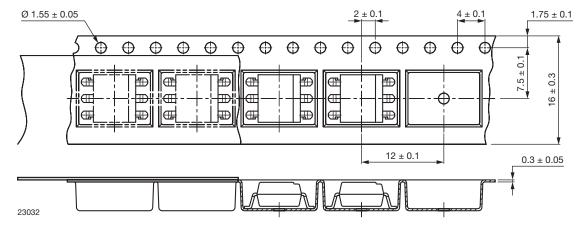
Tape and Reel Packaging (1000 pieces on reel)
